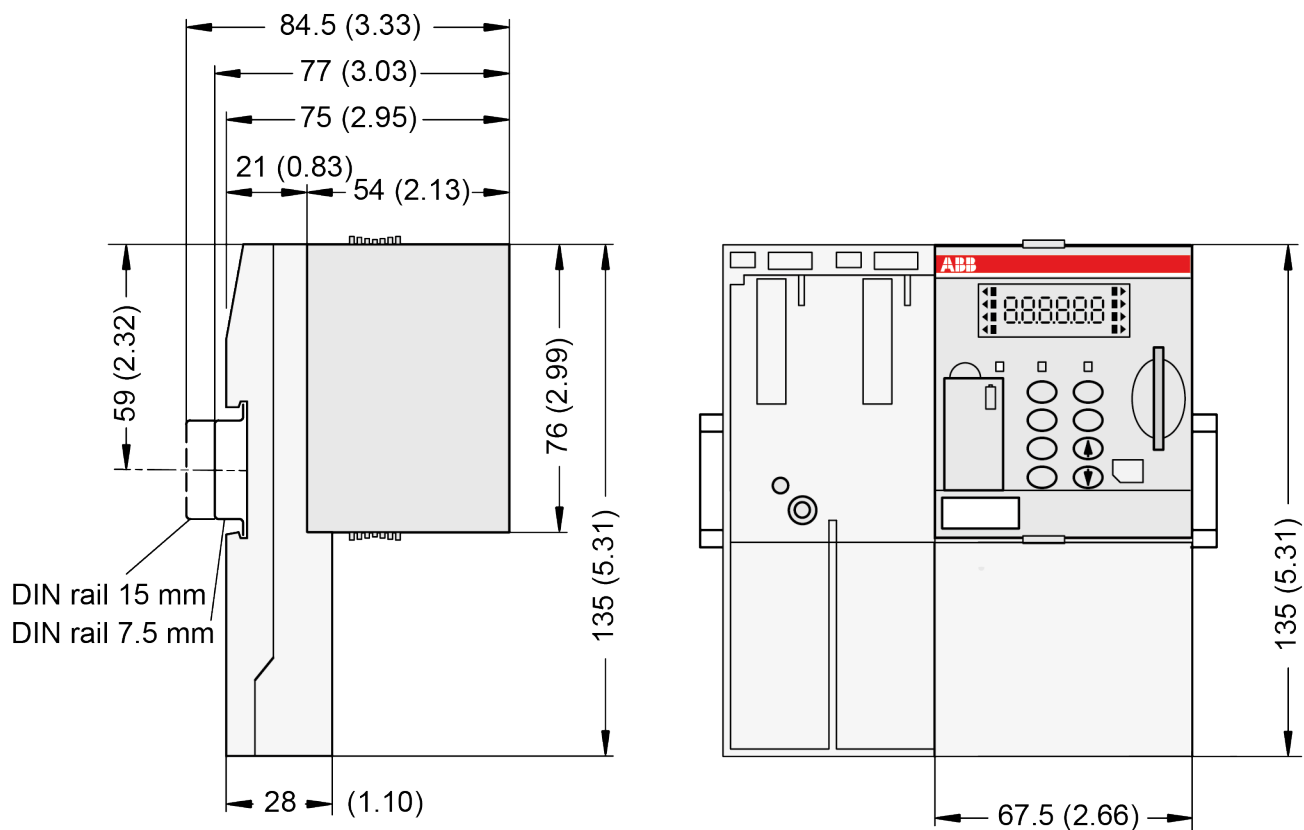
Terminal Bases with Processor Modules, side view and front view
